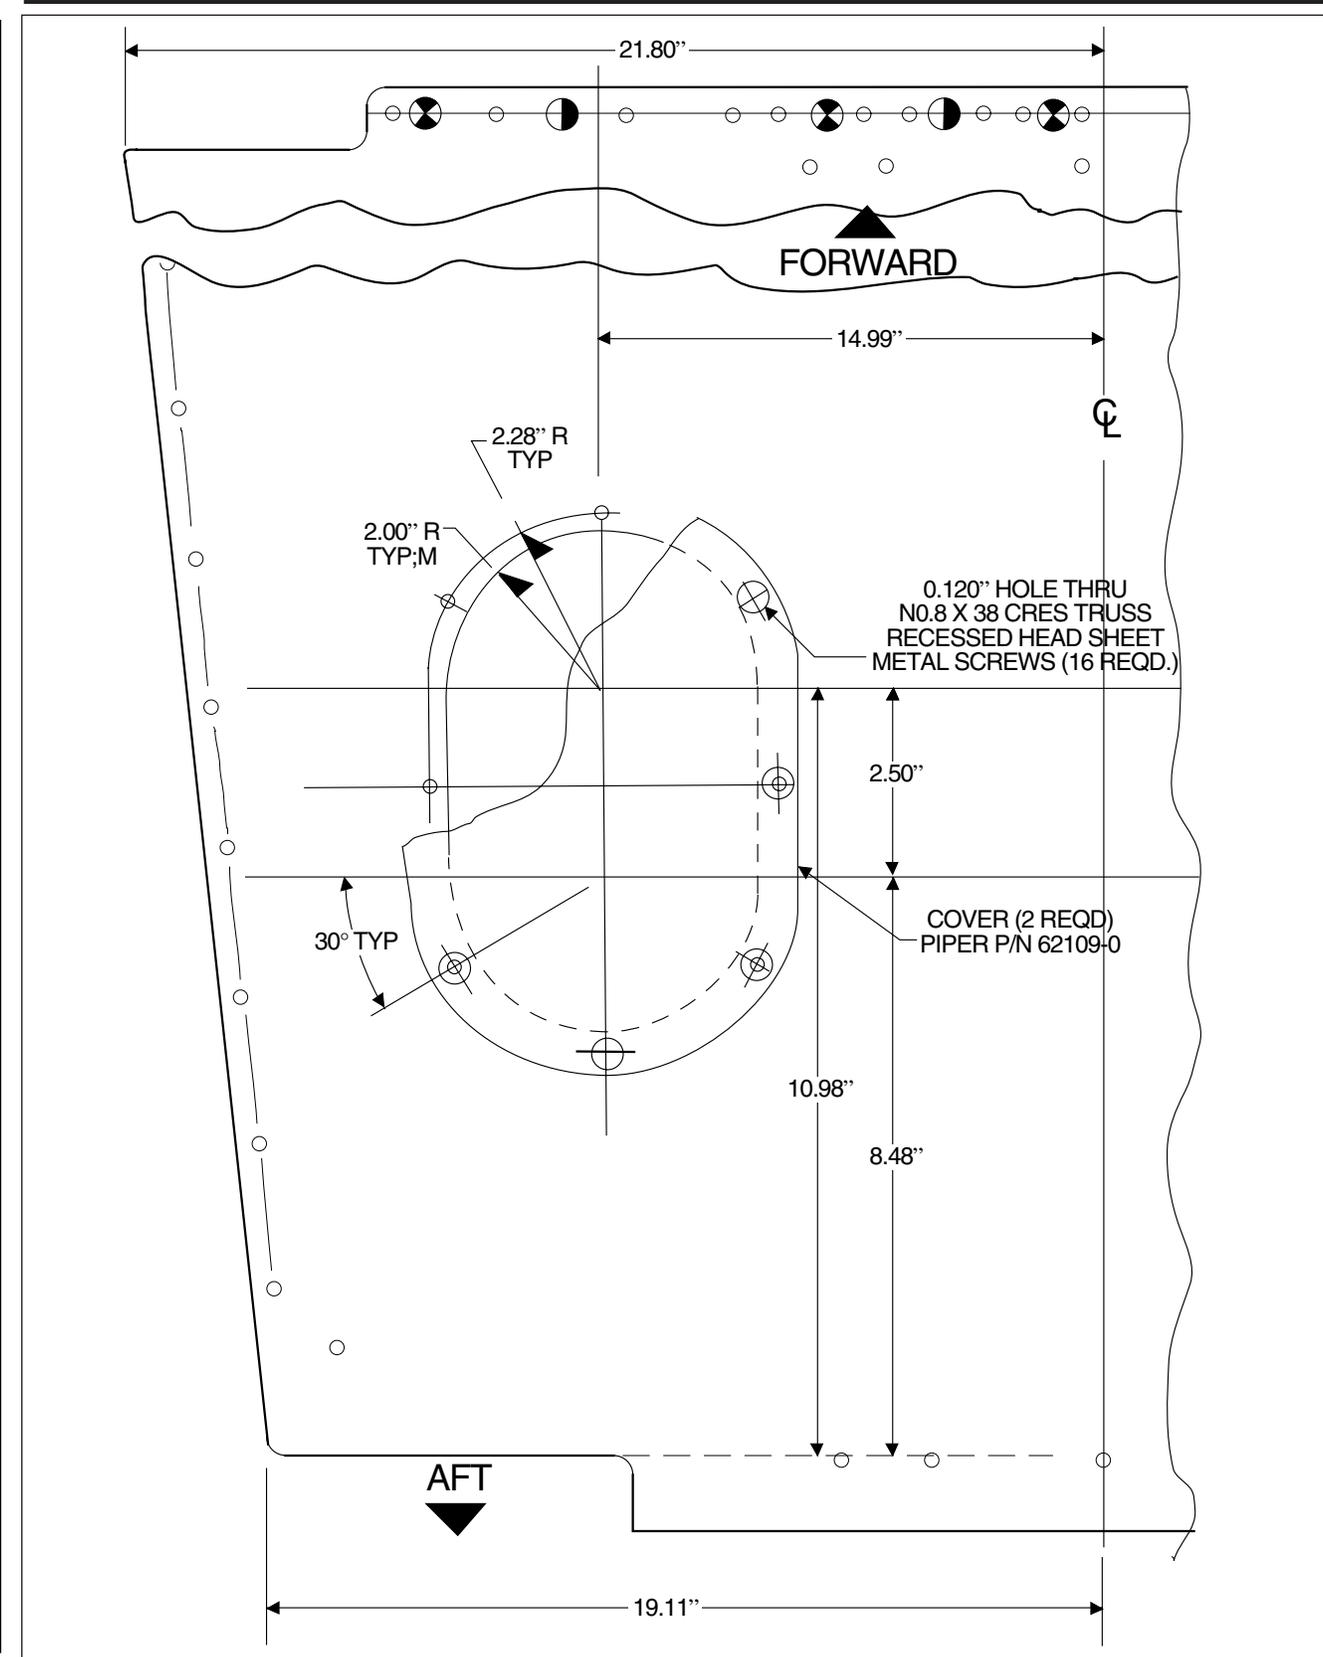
Baggage Compartment Inspection Holes Cutout Details
